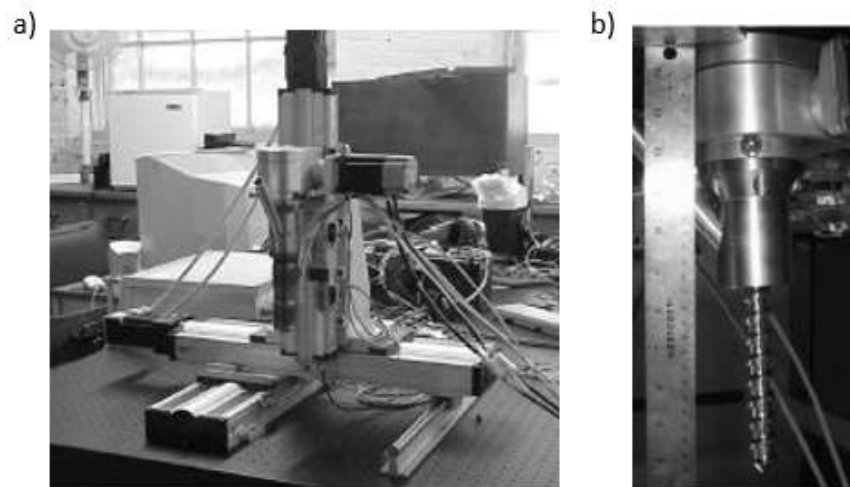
a) Mini Extruder Setup b) Screw profile [15]
